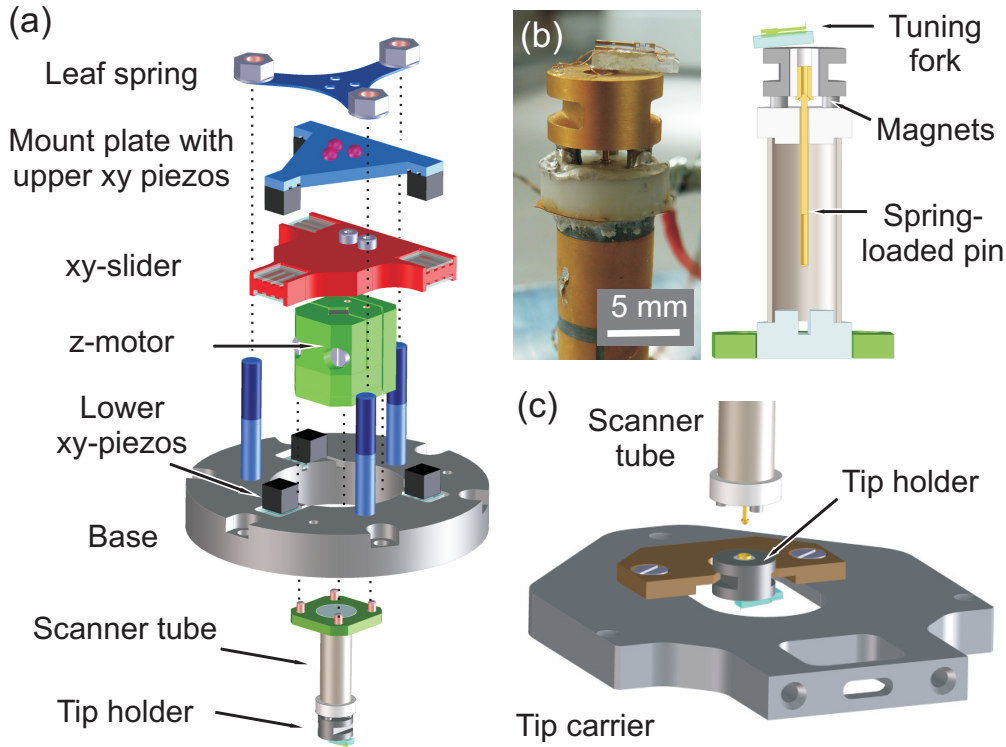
Assembly of the AFM unit. (a) Exploded view showing the xy-slider in red and the z-positioner in green. (b) Photograph and cross section of the scanner tube with the magnetic tip holder. (c) Tip carrier utilized for *in-situ* tip exchange.
